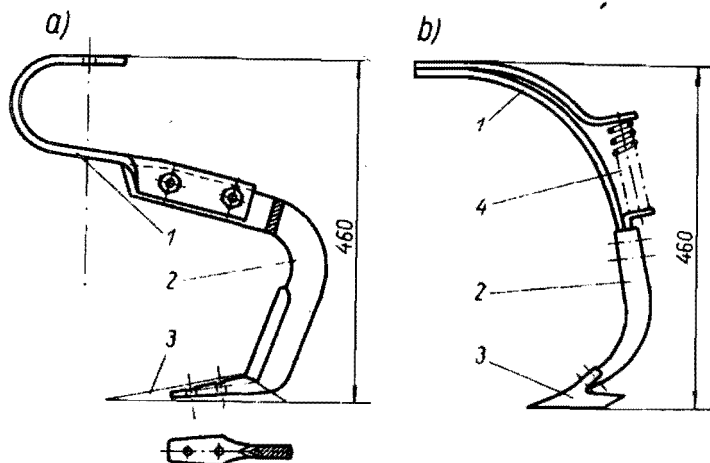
Semirigid cultivator teeth: a) with single plain spring; b) with additional helical spring (Arns); 1—plain spring; 2—shank; 3—sweep; 4—helical spring.
